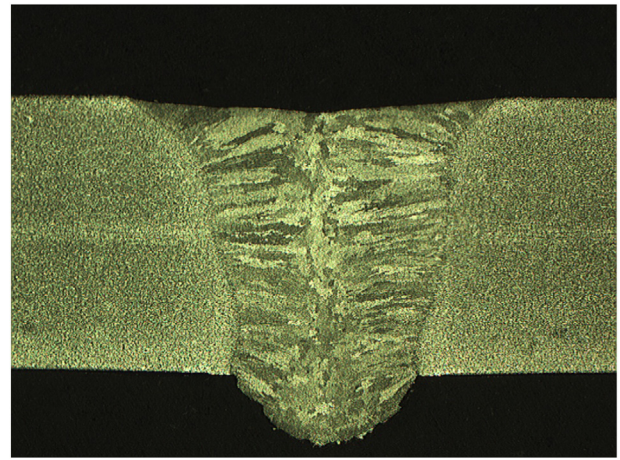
F-GTA weld cross-sectional profile with surface depression (190 A/150 mm/min).
